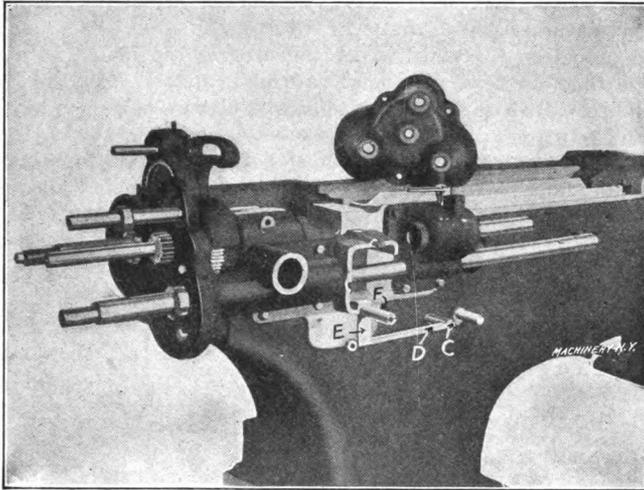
Method of Aligning Bracket and Feed Box on the Head End of a Turret Lathe
